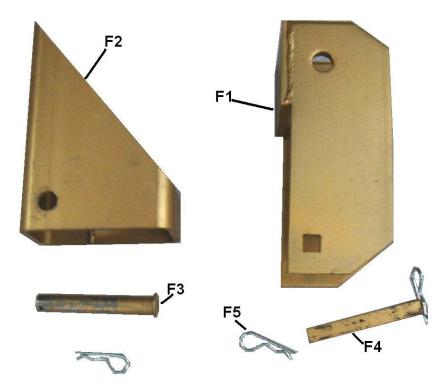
PARTS LIST IN PUSHER ASSEMBLY
